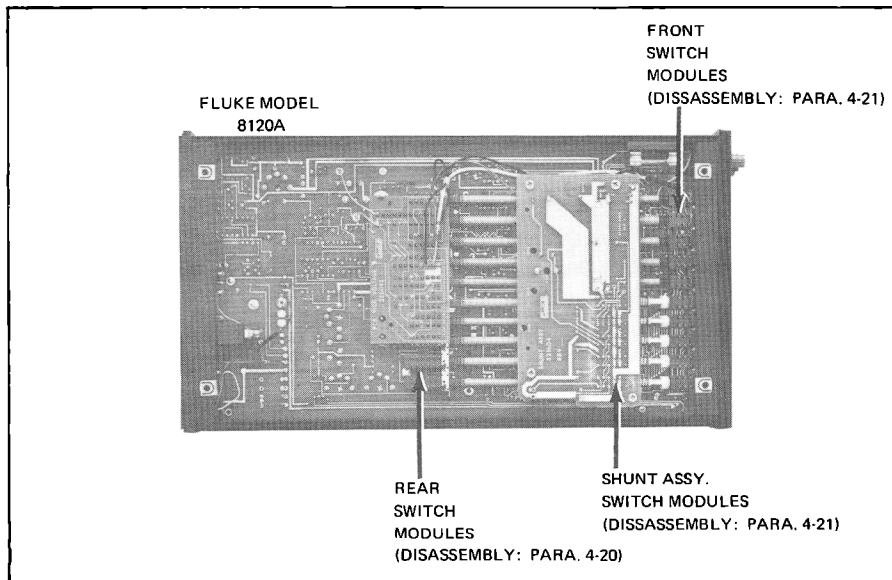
SWITCH MODULE LAYOUT AND CORRESPONDING DISASSEMBLY PROCEDURES
